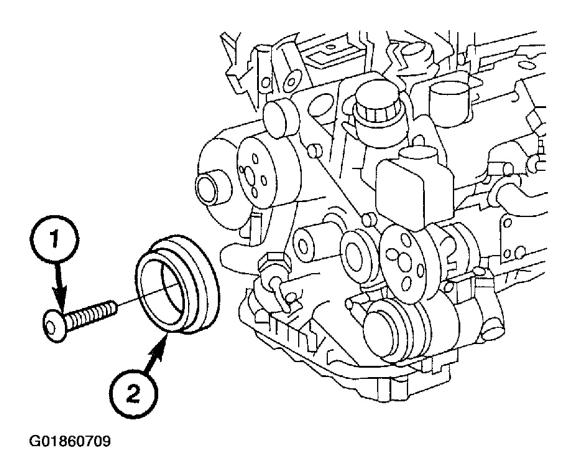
Removing Flywheel Locking Tool Courtesy of DAIMLERCHRYSLER CORP.
